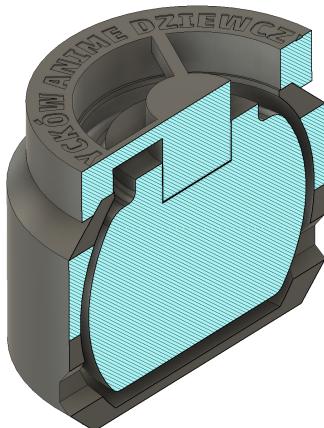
3D model of mold used to cast CycBot's silicone belly.
